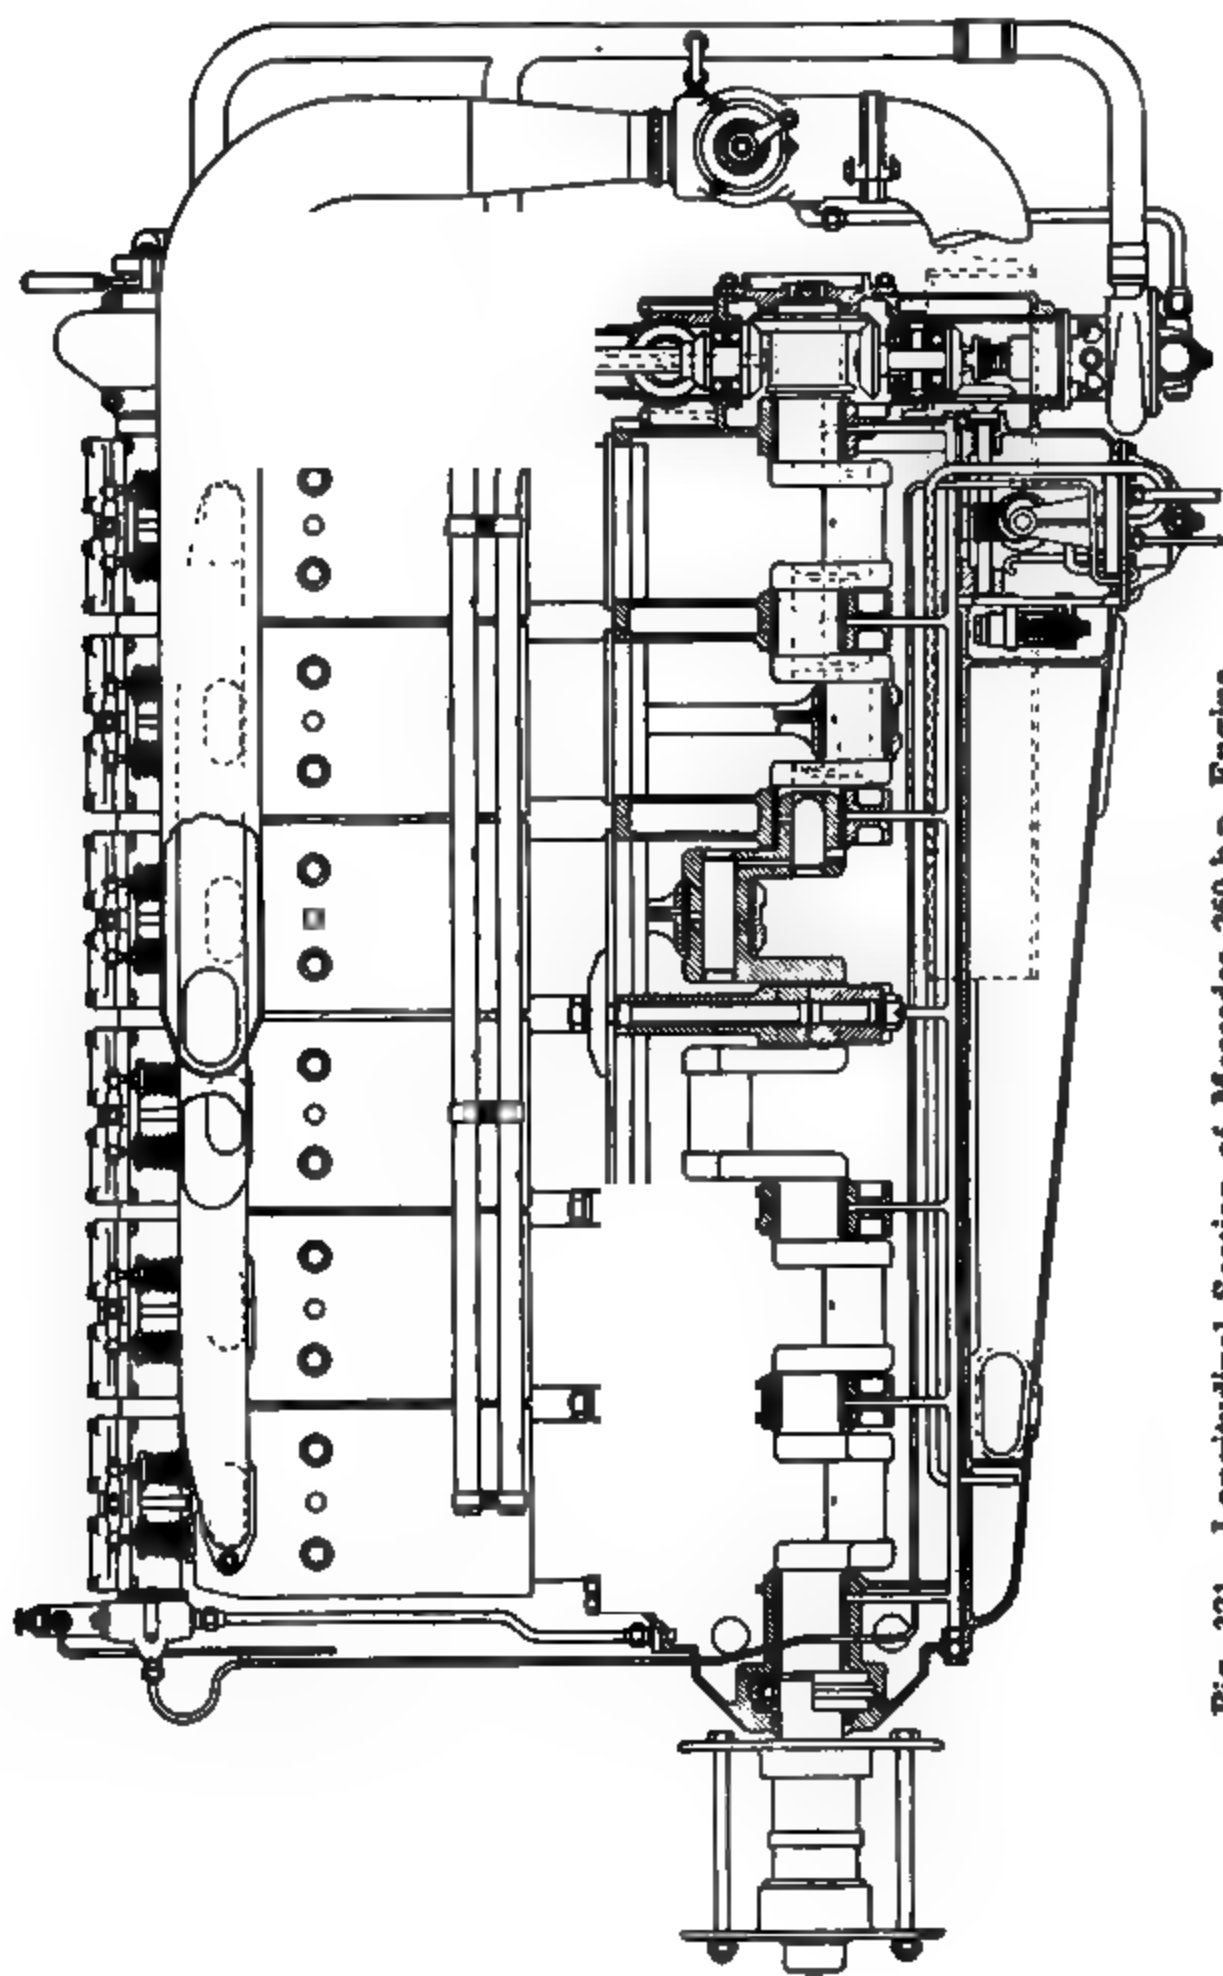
Longitudinal Section of Mercedes 260-h.p. Engine.
